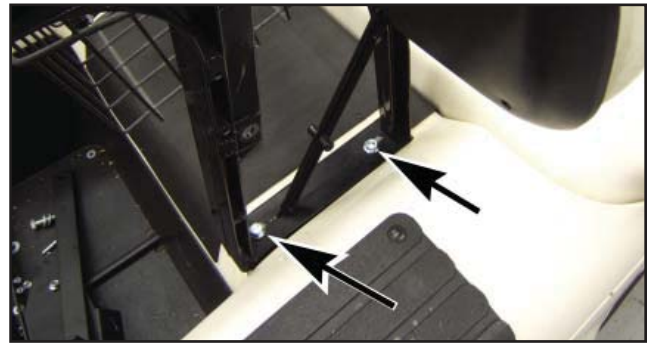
Remove Bag Rack/Seat Back Assembly
